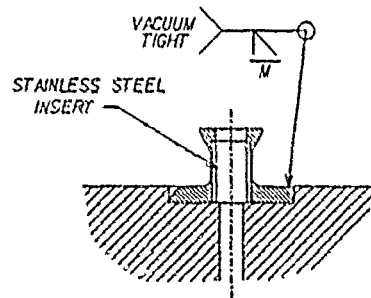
Welded joint between VCR spigot and vane body.
